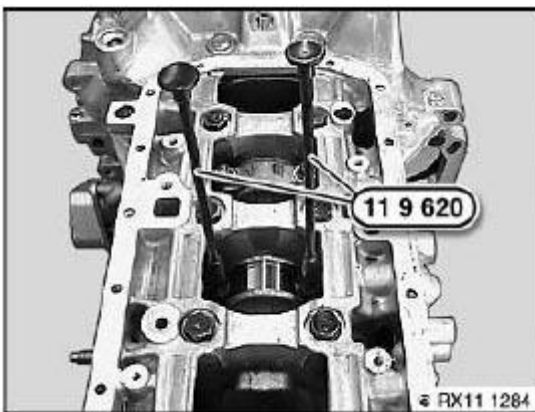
Attaching Special Tool (11 9 620) In Conrod Big End
